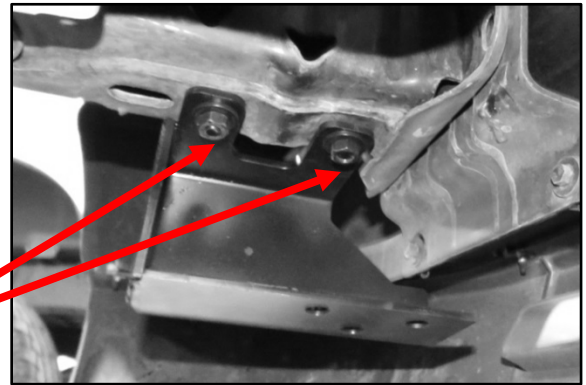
Insert the double bolt plate inside the DS & PS frame horn tube
